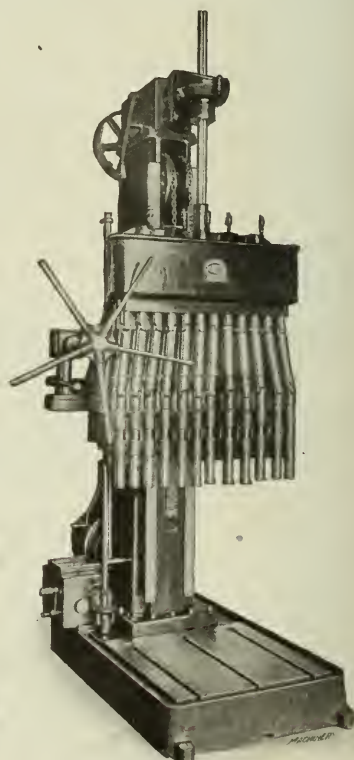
"Natco" No. 41 Straight-line Drilling Machine
